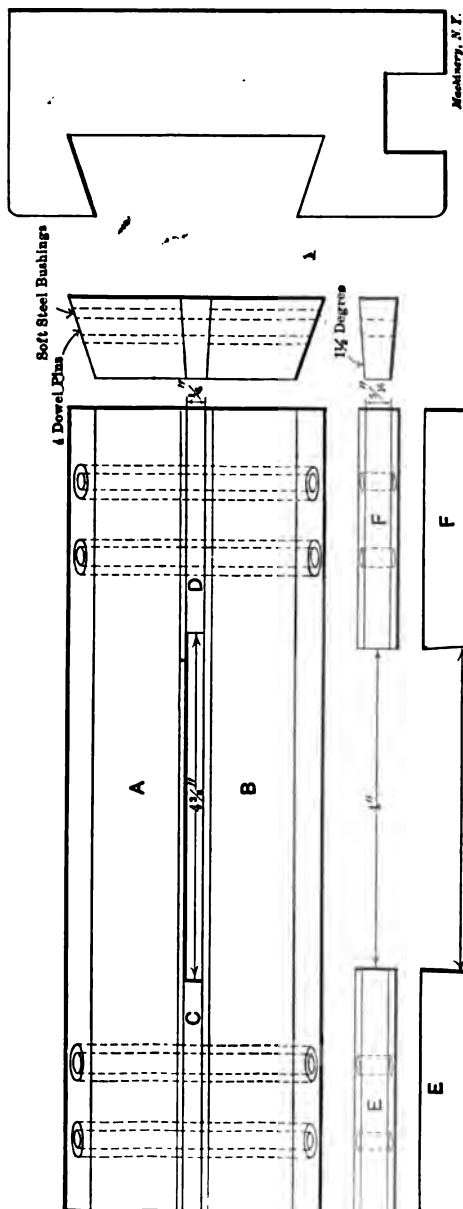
Die with Interchangeable Parts, Permitting Two Sizes of Blanks to be Punched by Changing the Center Pieces only
